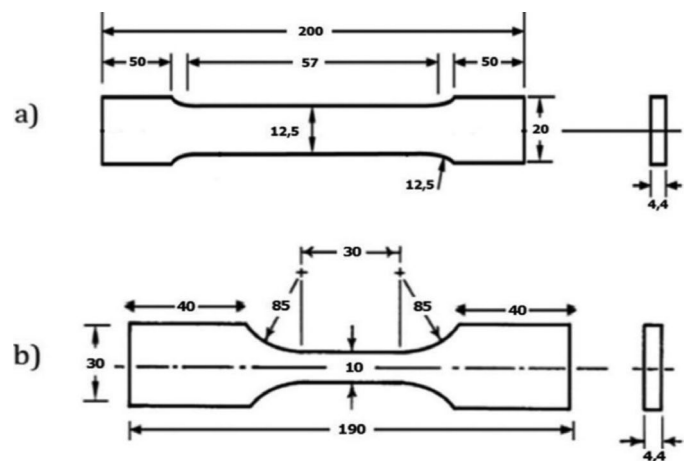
Standard sample sizes: (a) Tensile test. (b) Fatigue test (dimensions given in mm)
